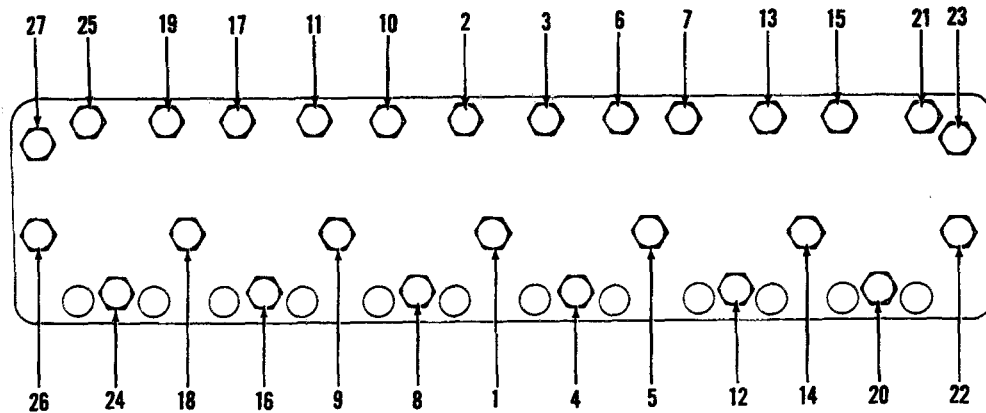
CYLINDER HEAD CAPSCREW TORQUING SEQUENCE
